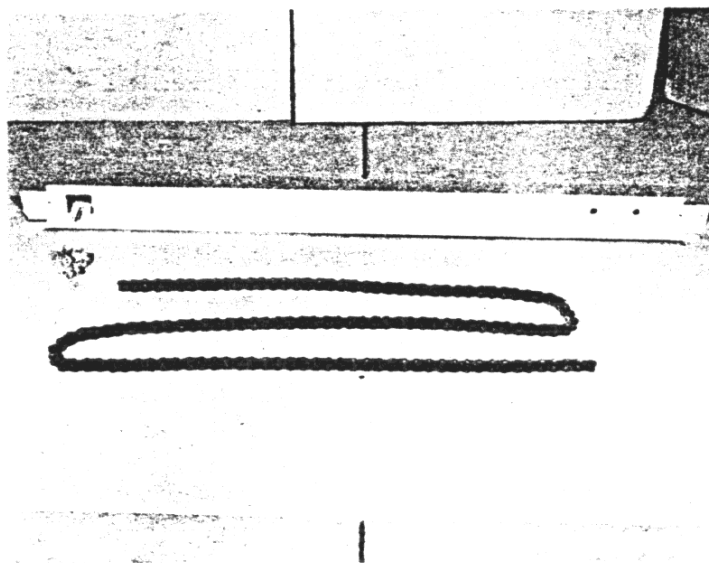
Spreader Bar, Chain and Idler Sprocket for Vacuum Metal Clad
